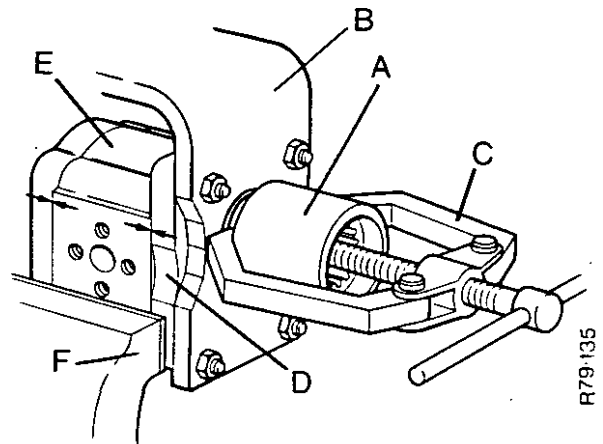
REMOVAL OF THE PUMP COUPLING
